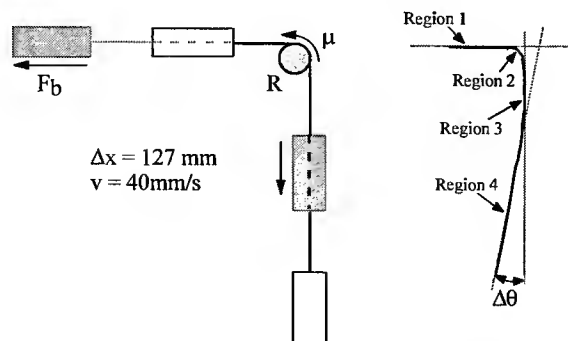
Schematic of the draw/bend test (left) and unloaded specimen shape after testing (right).
